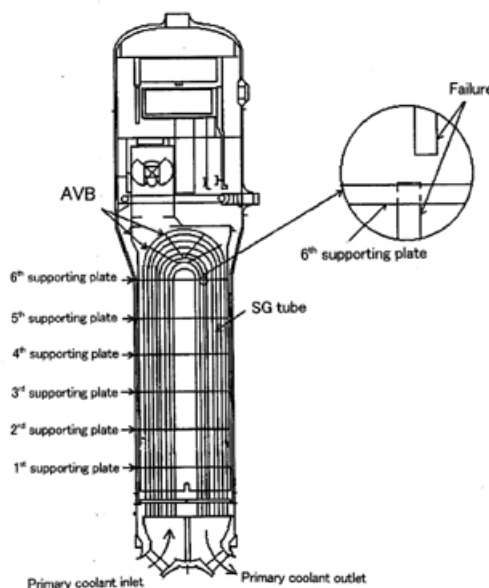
Mihama steam generator and the location of failure of the steam generator tube [24].
